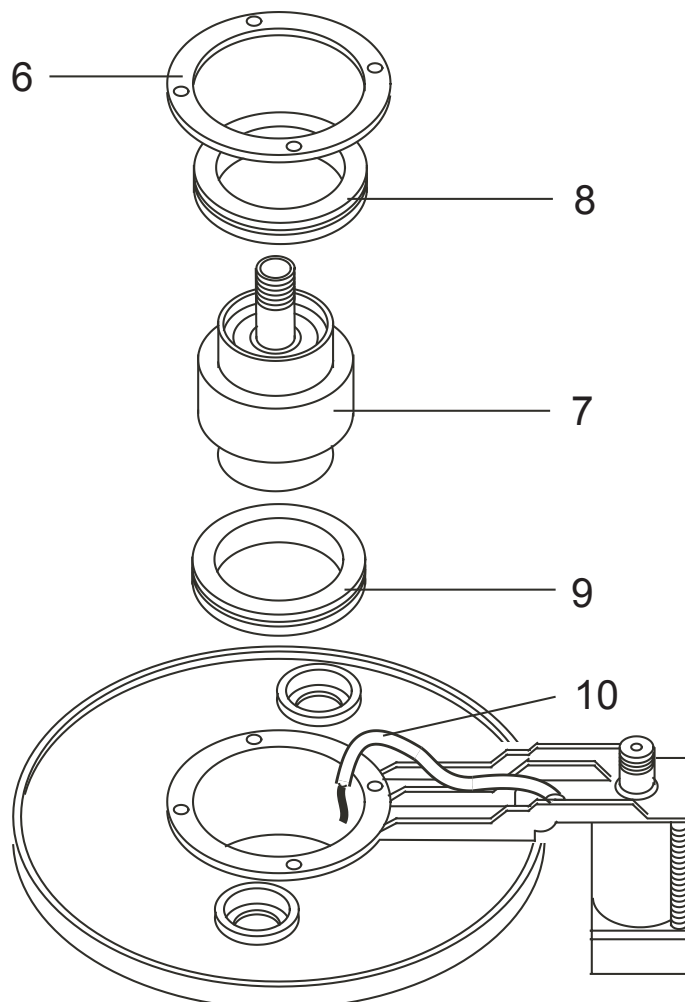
m Removing the bearing housing from underneath the lower end cover
